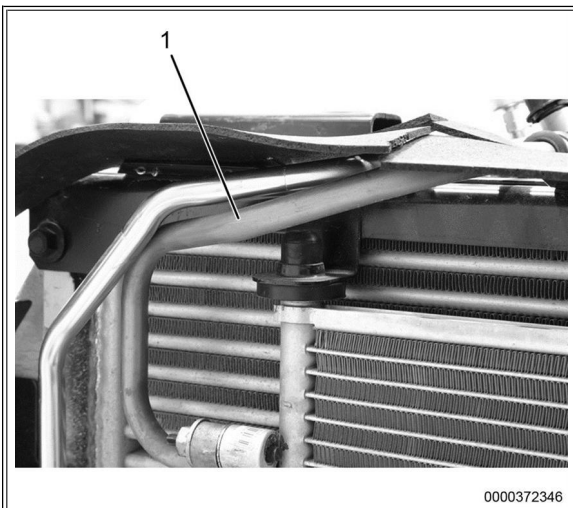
A/C Compressor Discharge Line - Cummins Equipped ProStar 122.
